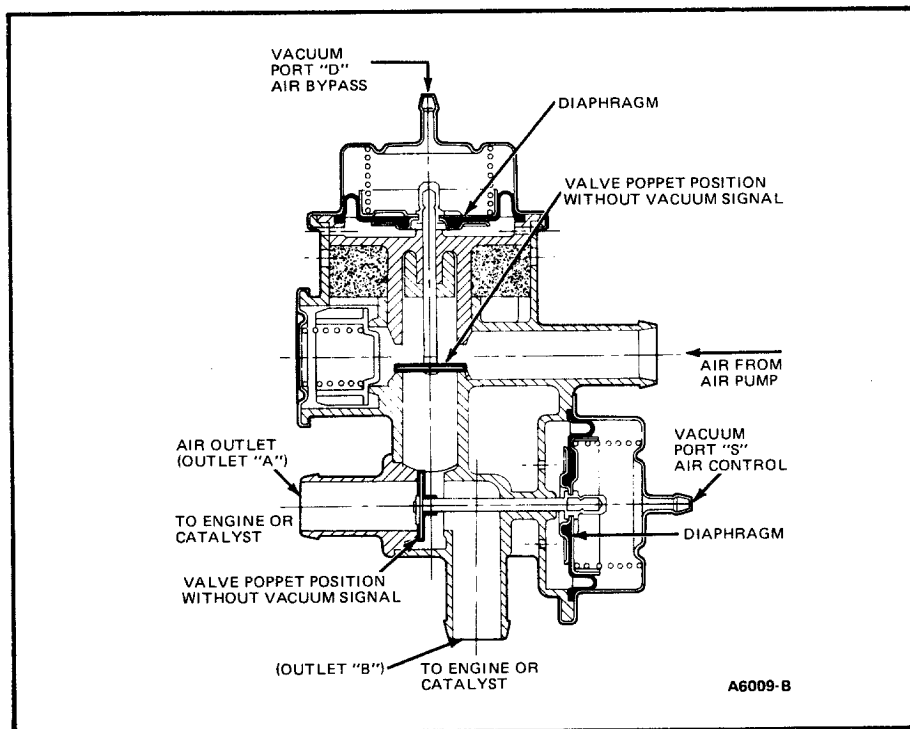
Valve Assembly—Exhaust Air Supply Control
